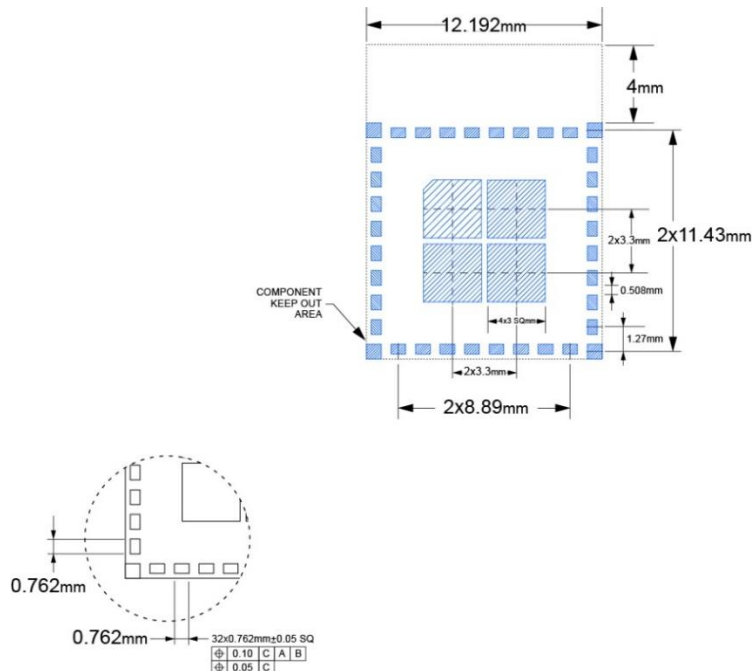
CQM711-0-50-0B Module PCB Landing Pattern
